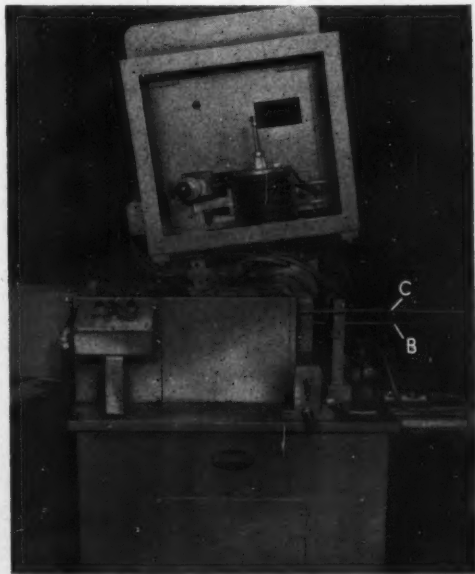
View of the welding head with the front cover removed to show the output transformer
